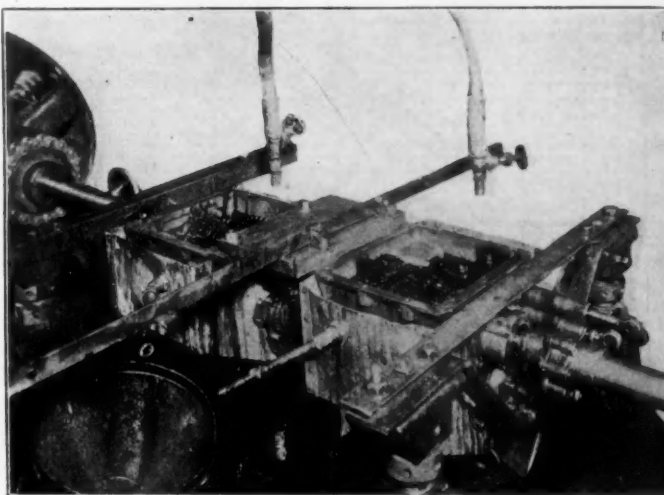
THE TWO GEARSETS AS ARRANGED FOR TESTING
